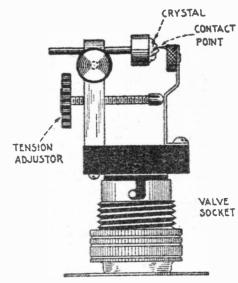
Carborundum Crystal Holder to Fit Fleming Valve Socket.
